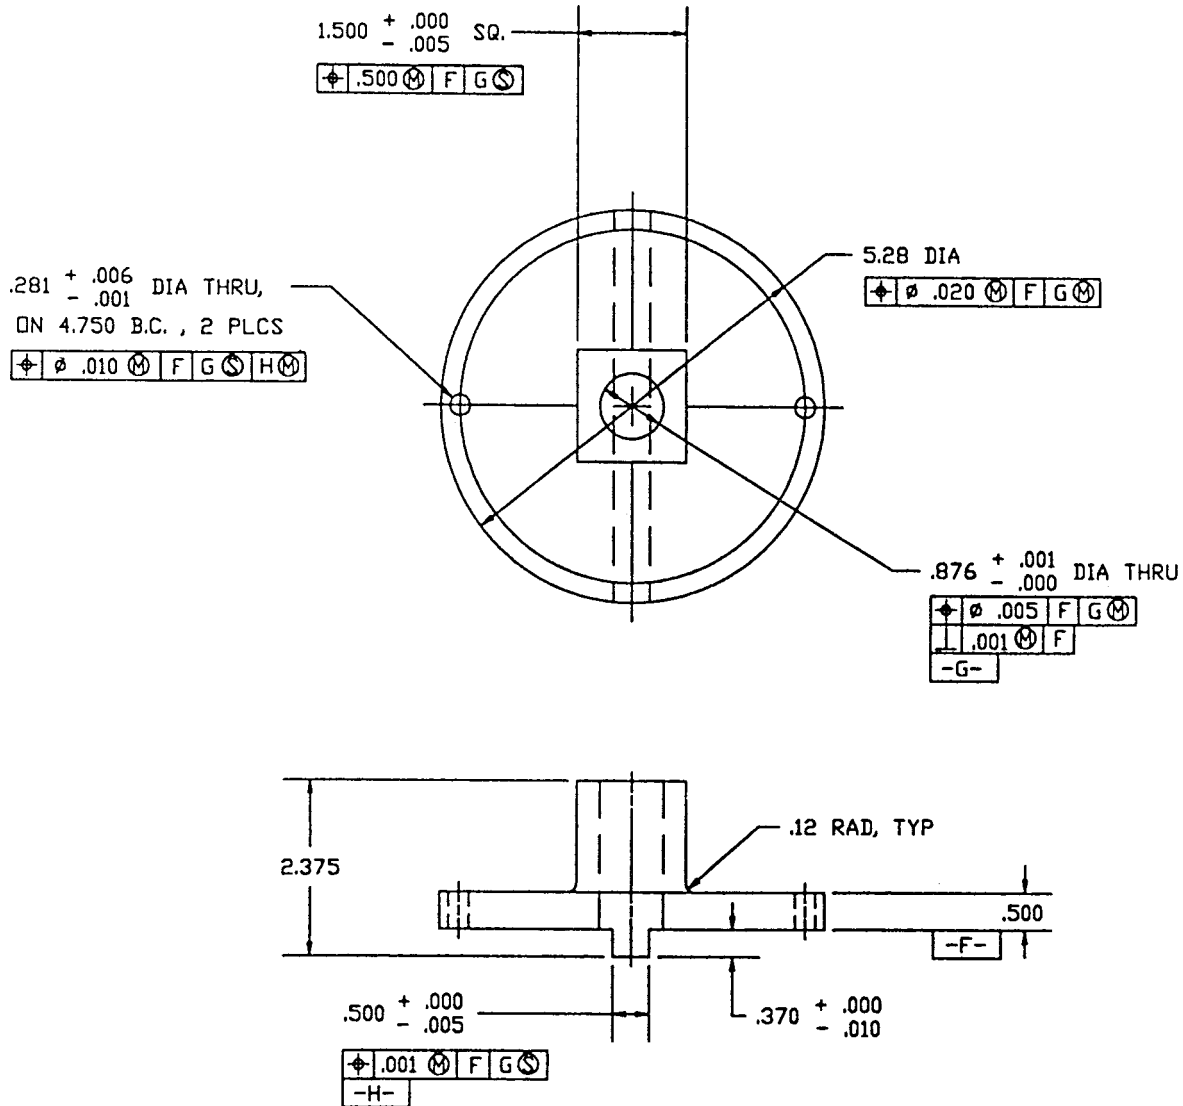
Adaptor for the Shear Fixture in Inch-Pound Units
